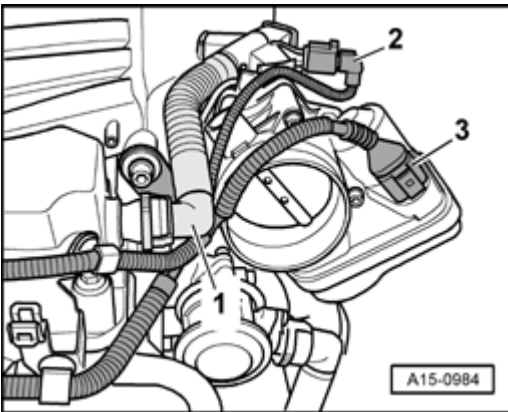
Disconnecting Electrical Connectors & Crankcase Breather Hose
